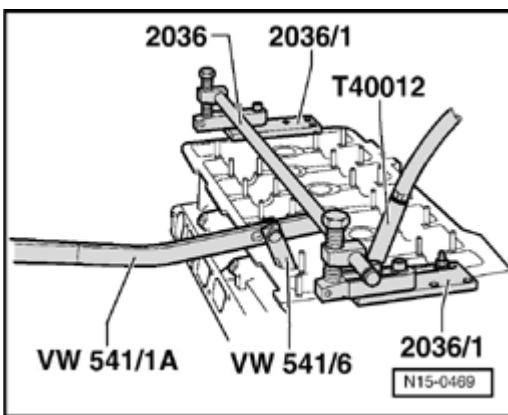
Identifying Adjustable Rod 2036, Adapter T40012 And Valve Lever VW 541/1 A
